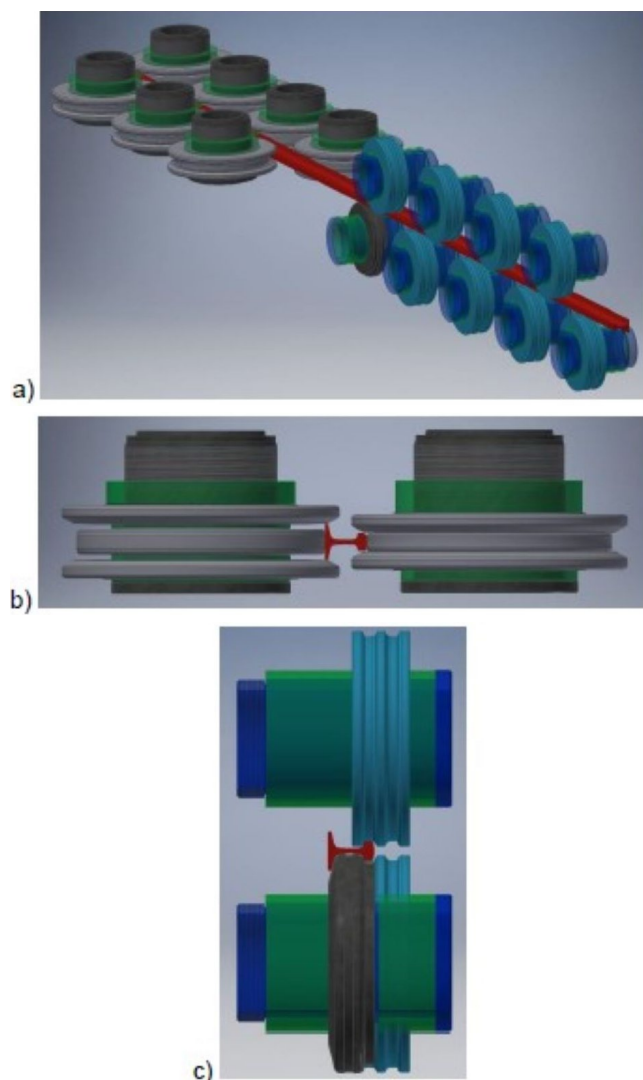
Scheme of straightening railway rails a) set of straighteners: the first vertical (7 rollers), the second horizontal (9 rollers) b) rail in the vertical straightener c) rail in the horizontal straightener
